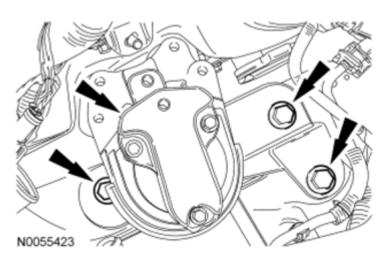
Locating Engine Mount Bolts Courtesy of FORD MOTOR CO.
